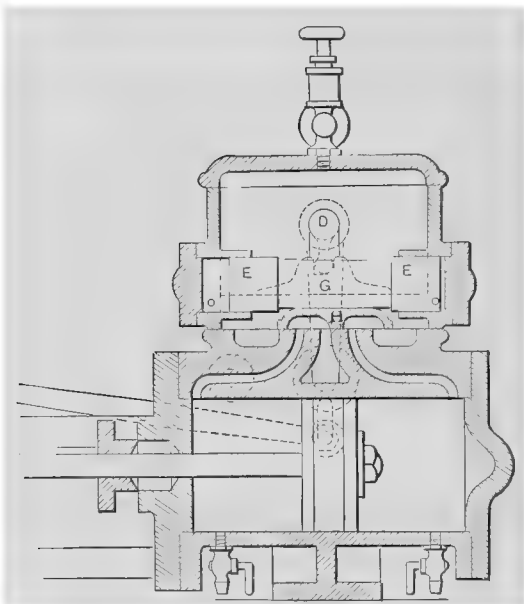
Steam-cylinder, Guild & Garrison pump.
